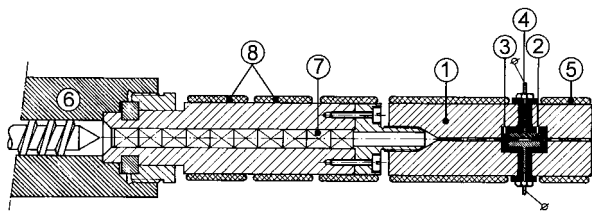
Schematic representation of the extruder, mixing section and sheet extrusion die used for processing the polymer blends.
